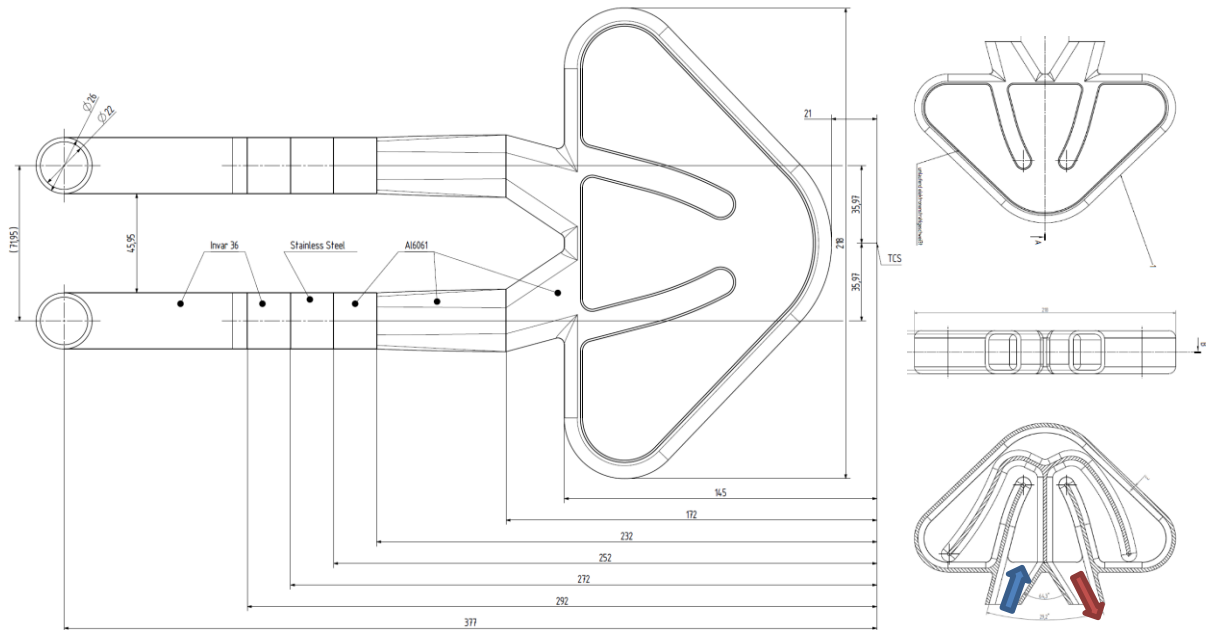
ESS cold moderator design solution: Left: vessel including friction welding adapter. Right: cut view including optimized fluid guides.
